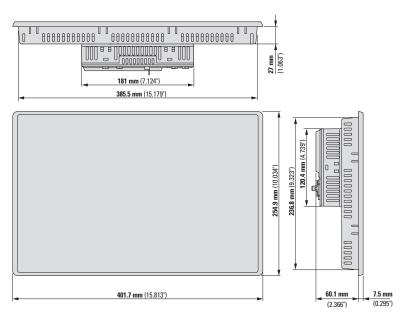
Dimensions for 15.6" front mounting devices in mm (inches)
